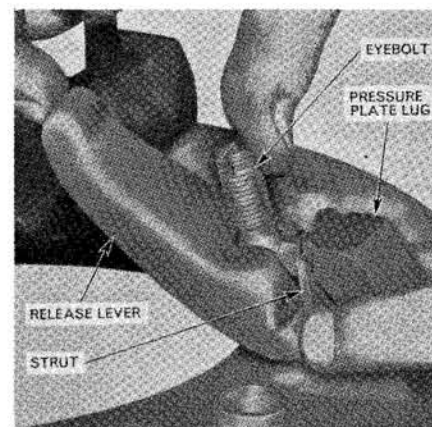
Assembling release lever, strut, lever pin and eyebolt to clutch pressure plate.
